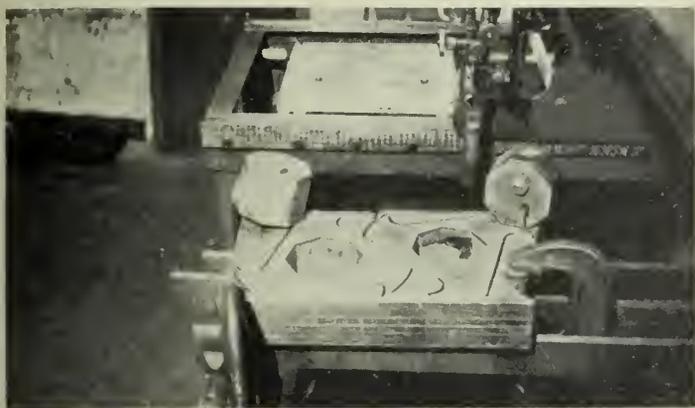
Close-up Showing Templet and Stack of Plate with two Sets of Parts Completely Cut.
